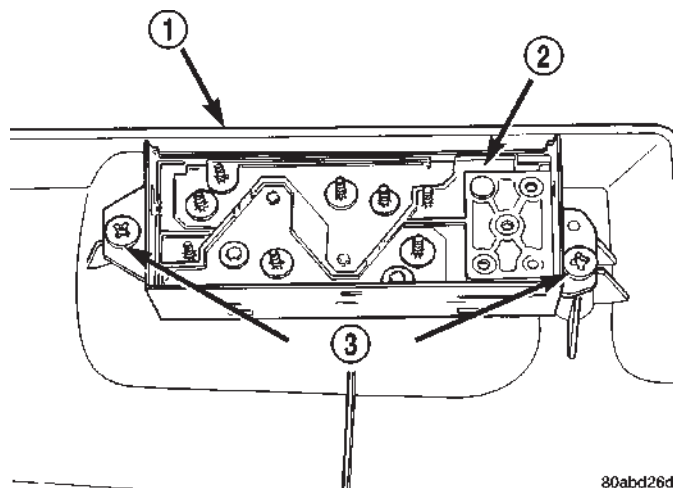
Power Seat Switch Remove/Install - Extended Cab
